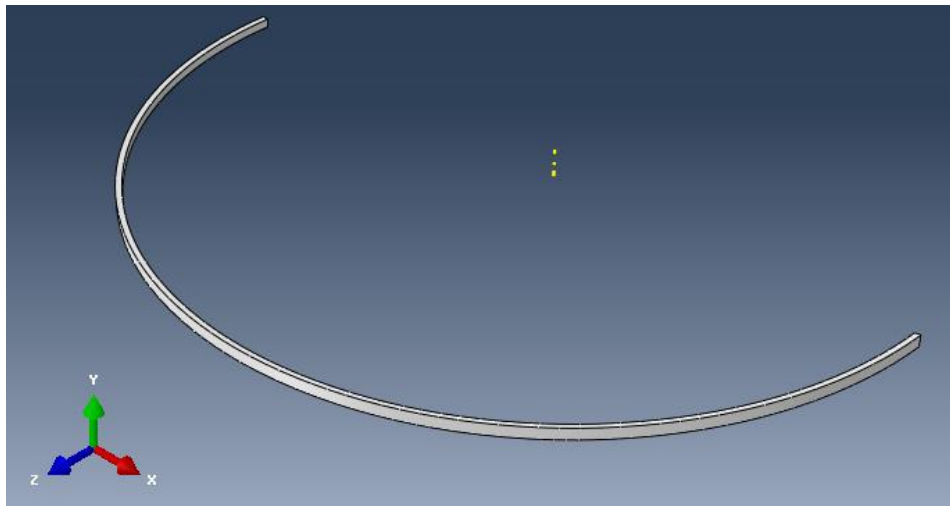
180° revolved single thread used for creating helical thread parts.
